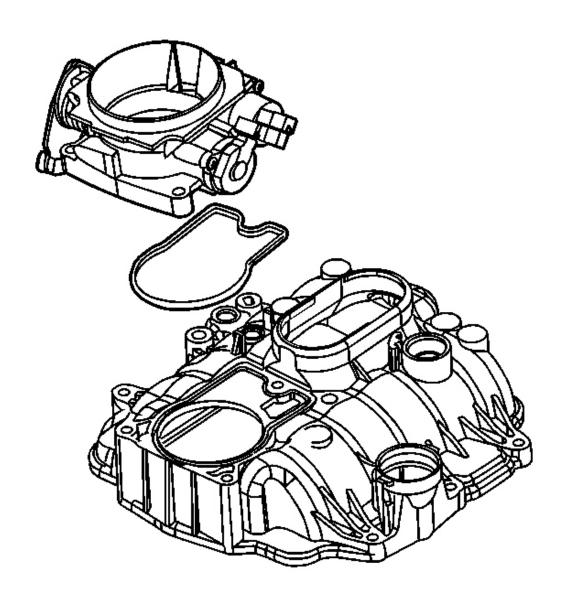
View Of Throttle Body & Gasket Courtesy of GENERAL MOTORS CORP.
